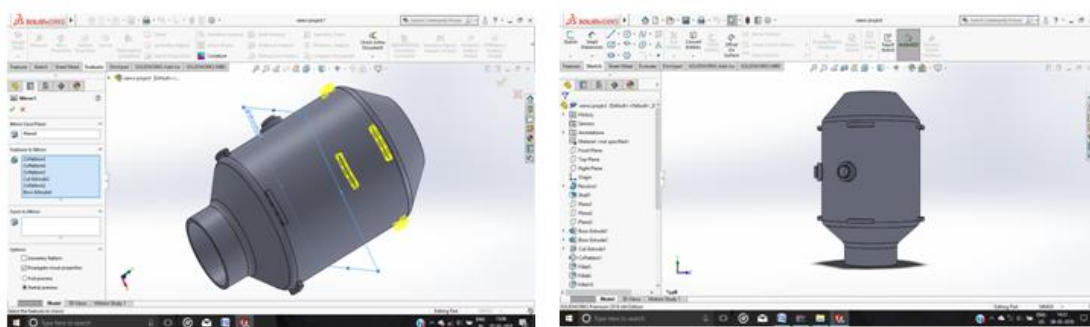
shows mirror option for combustion chamber outer case Fig.23 shows the 3D model of combustion chamber outer case (front view) case bolting locations
